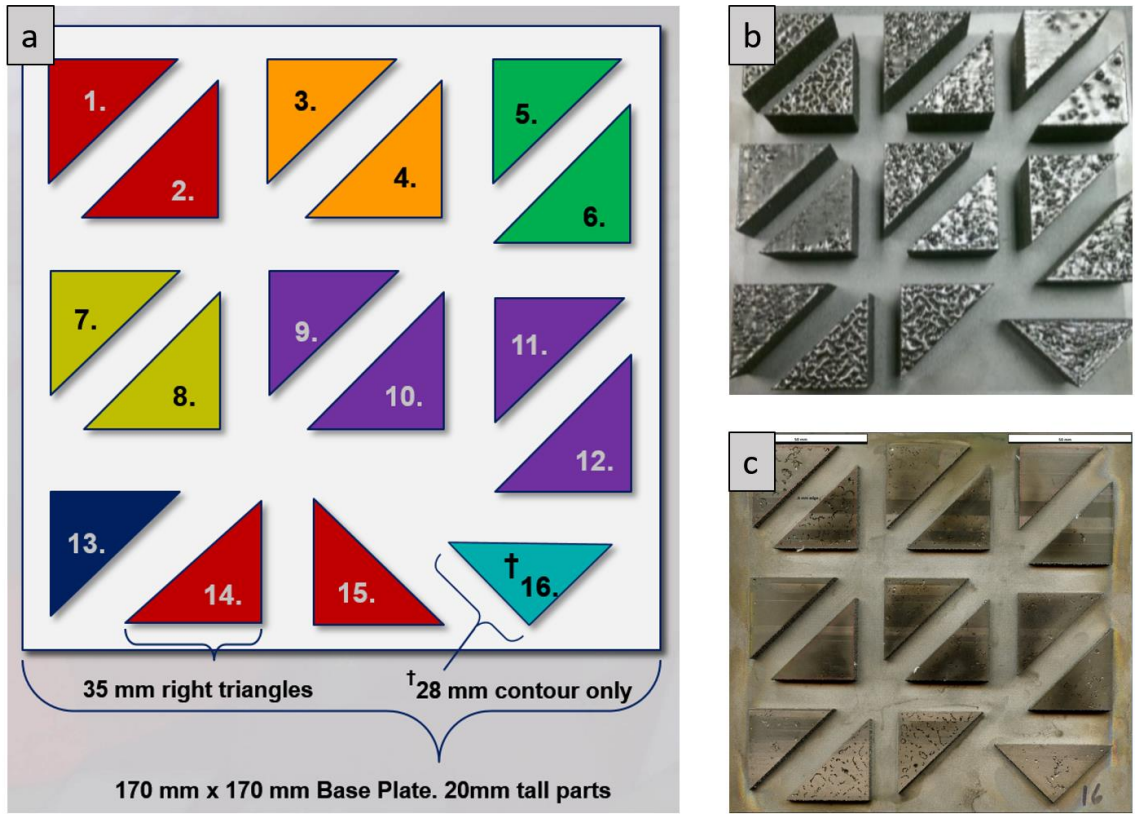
(a) Build A1 Layout (b) Image of top surface (c) After wire EDM removed top.
